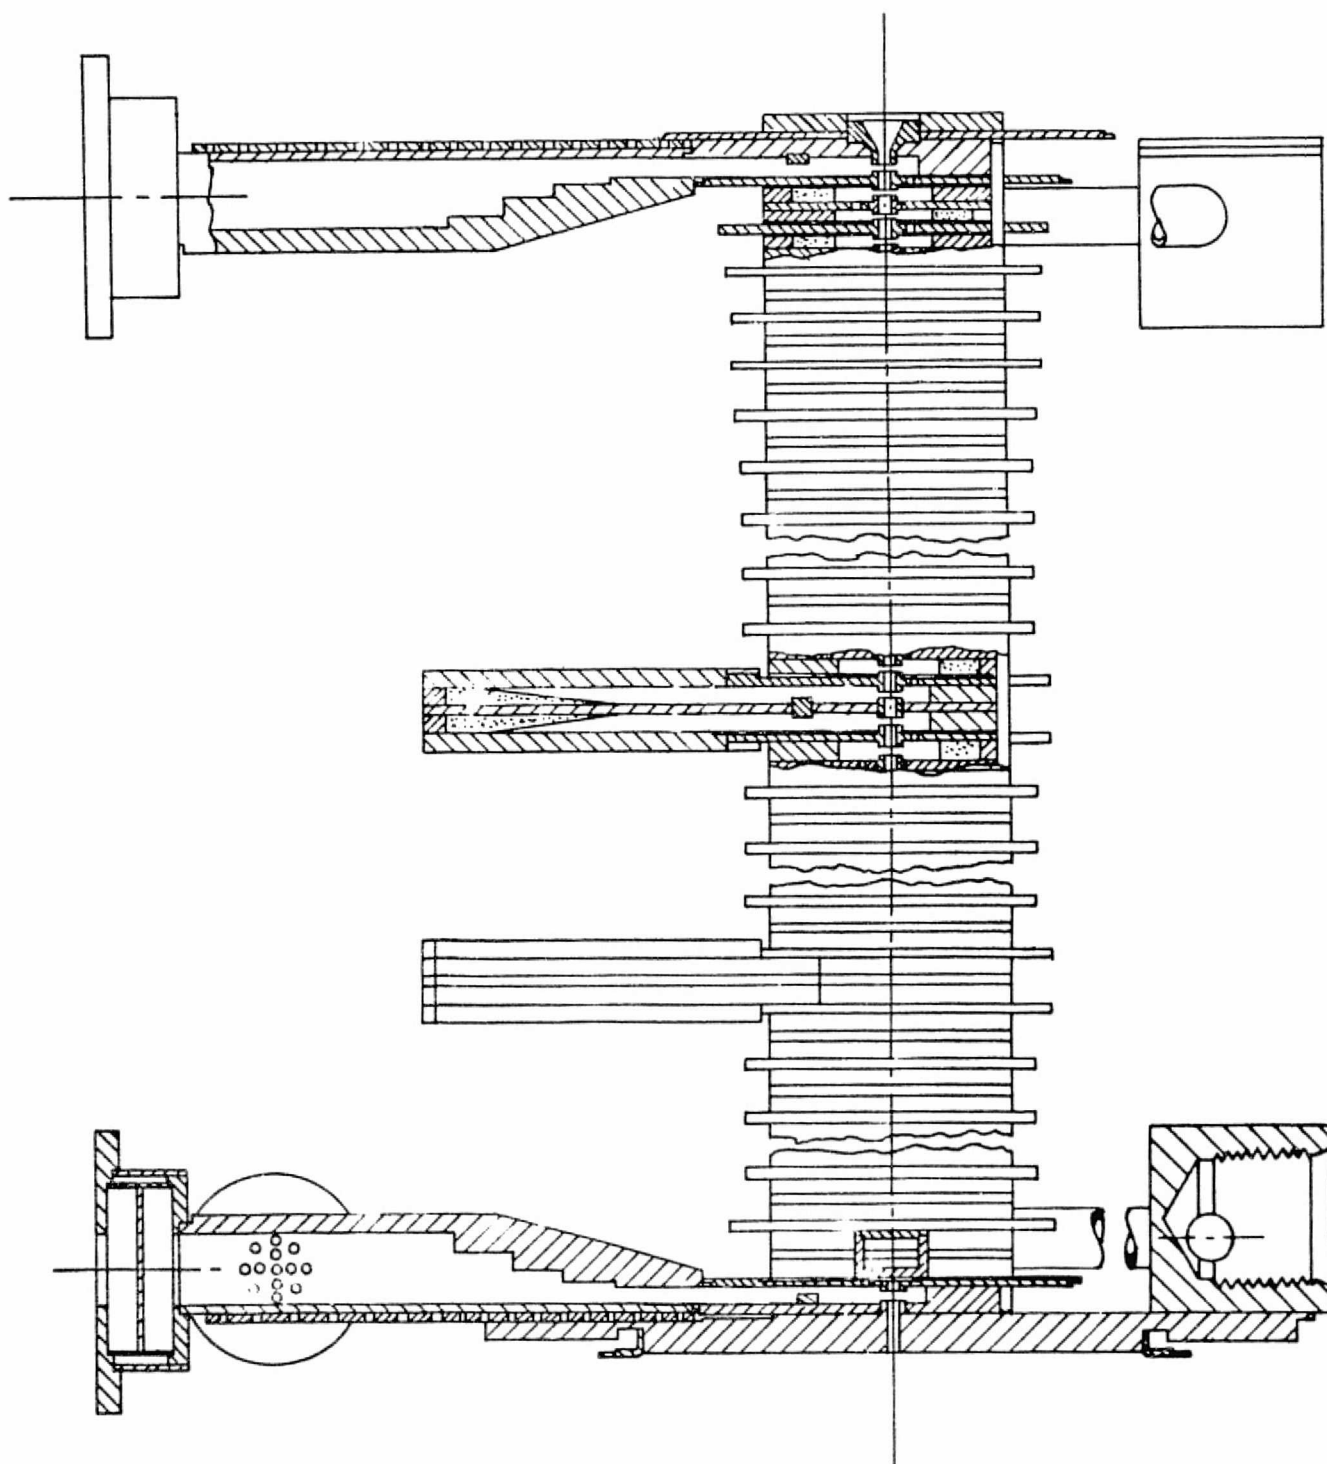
MECHANICAL CIRCUIT ASSEMBLY WITH COOLING
